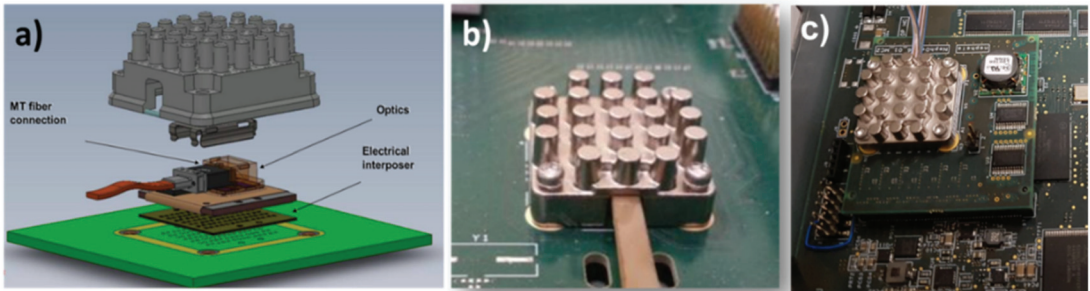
Finisar midboard optical transceiver module package: (a) schematic view of Finisar “BOA” module [3], (b) photo of Finisar BOA module assembled directly onto a PCB, (c) photo of Finisar BOA module on a pluggable small mezzanine card [12].
